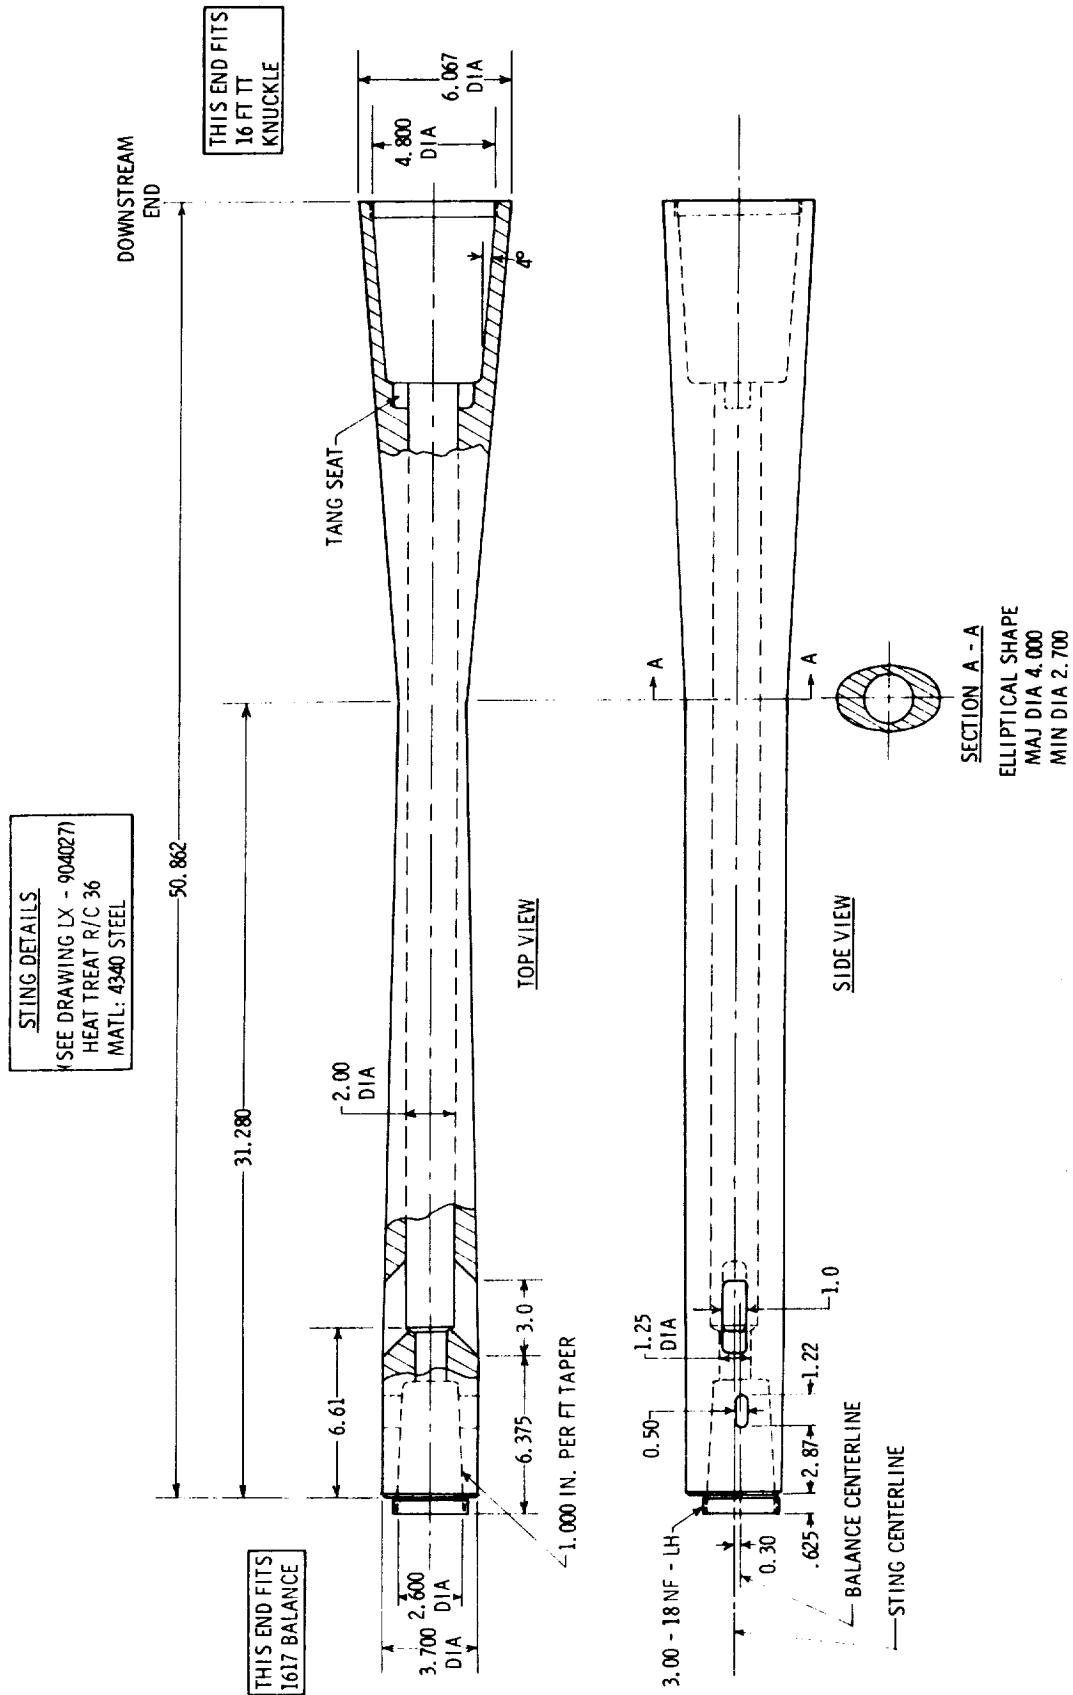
Sketch of sting LX-904027. (All dimensions are in inches unless otherwise indicated.)
